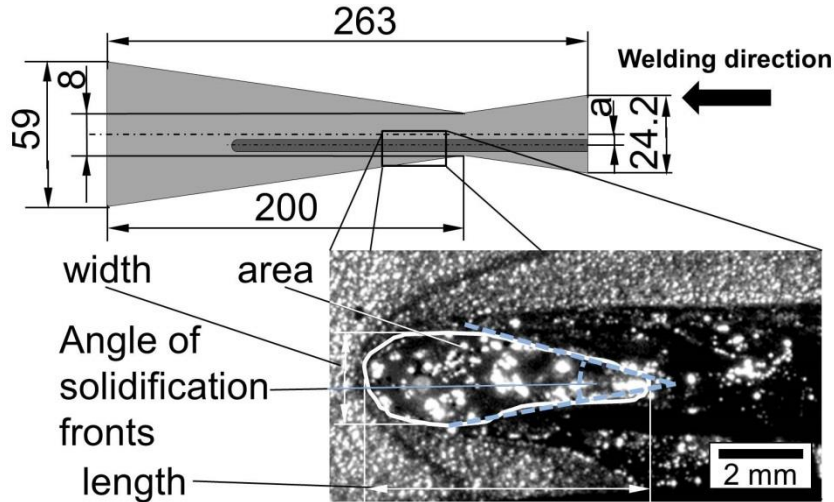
Geometry of the Double-fan-shaped specimens and exemplary high-speed image for the determination of the weld pool dimensions
